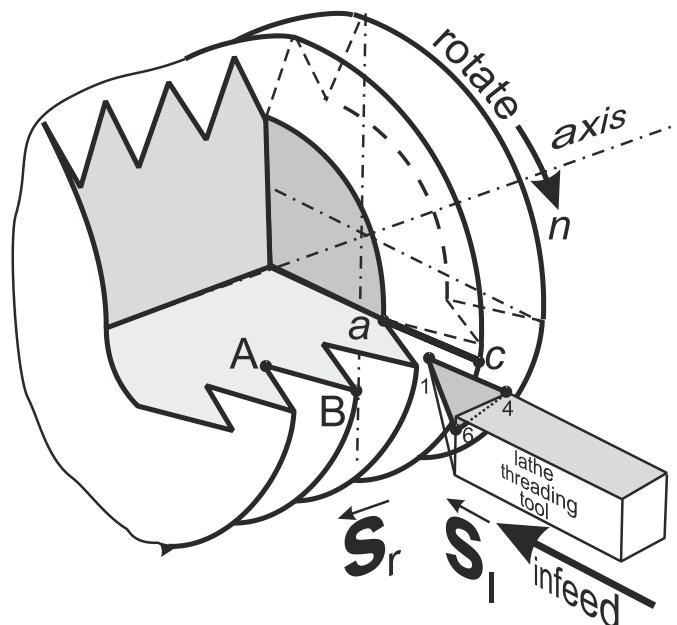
Schema of threading by lathe tool with nonzero cutting edge inclination.
